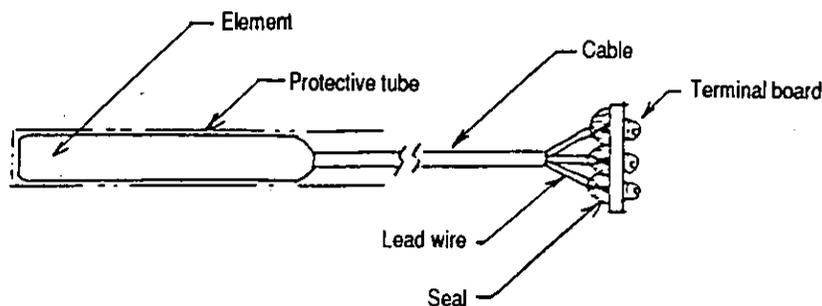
Example of a Sealed Sensor Terminal Ass'y
